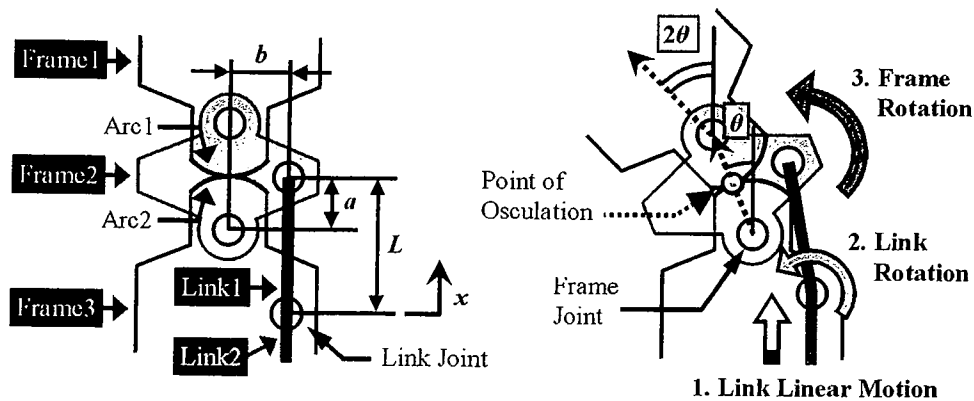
Basic concept of 1-DOF bending mechanism. Left is component of the mechanism. Right is rolling of Frame1 around Frame3 jointed with Frame2 by linear motion of Link joint.
